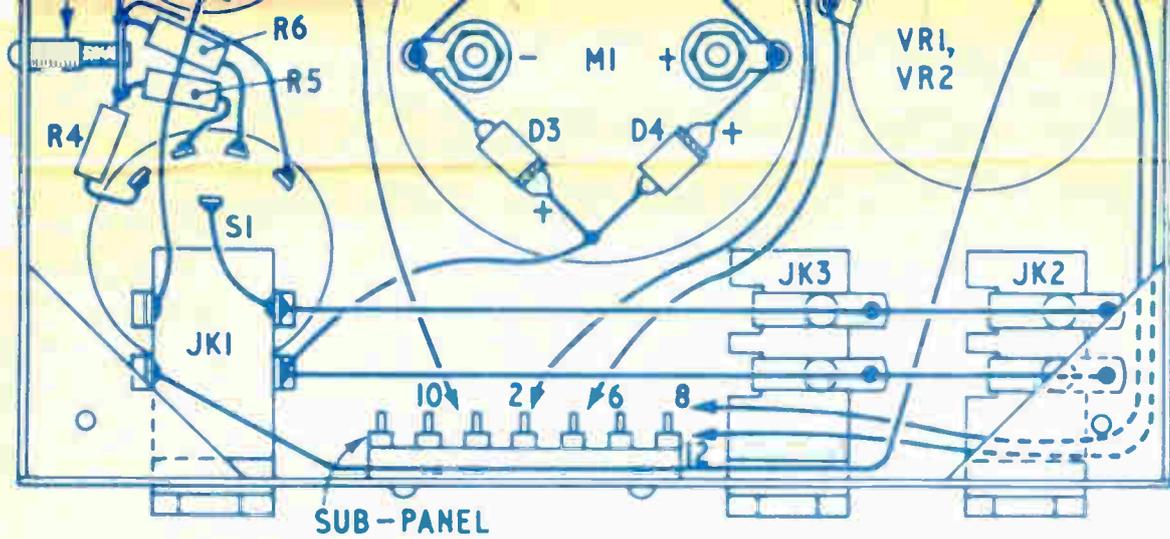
VIEW ON UNDERSIDE OF CHASSIS
